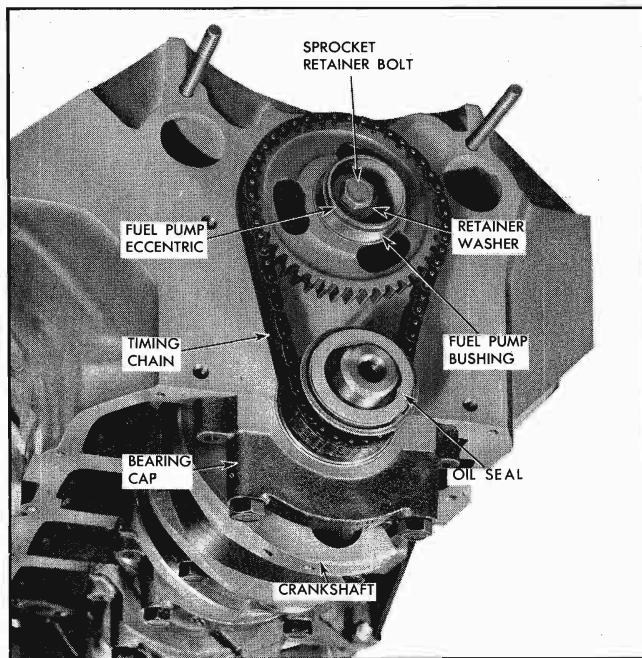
Front View of Engine with Oil Pan and Timing Chain Cover Removed
